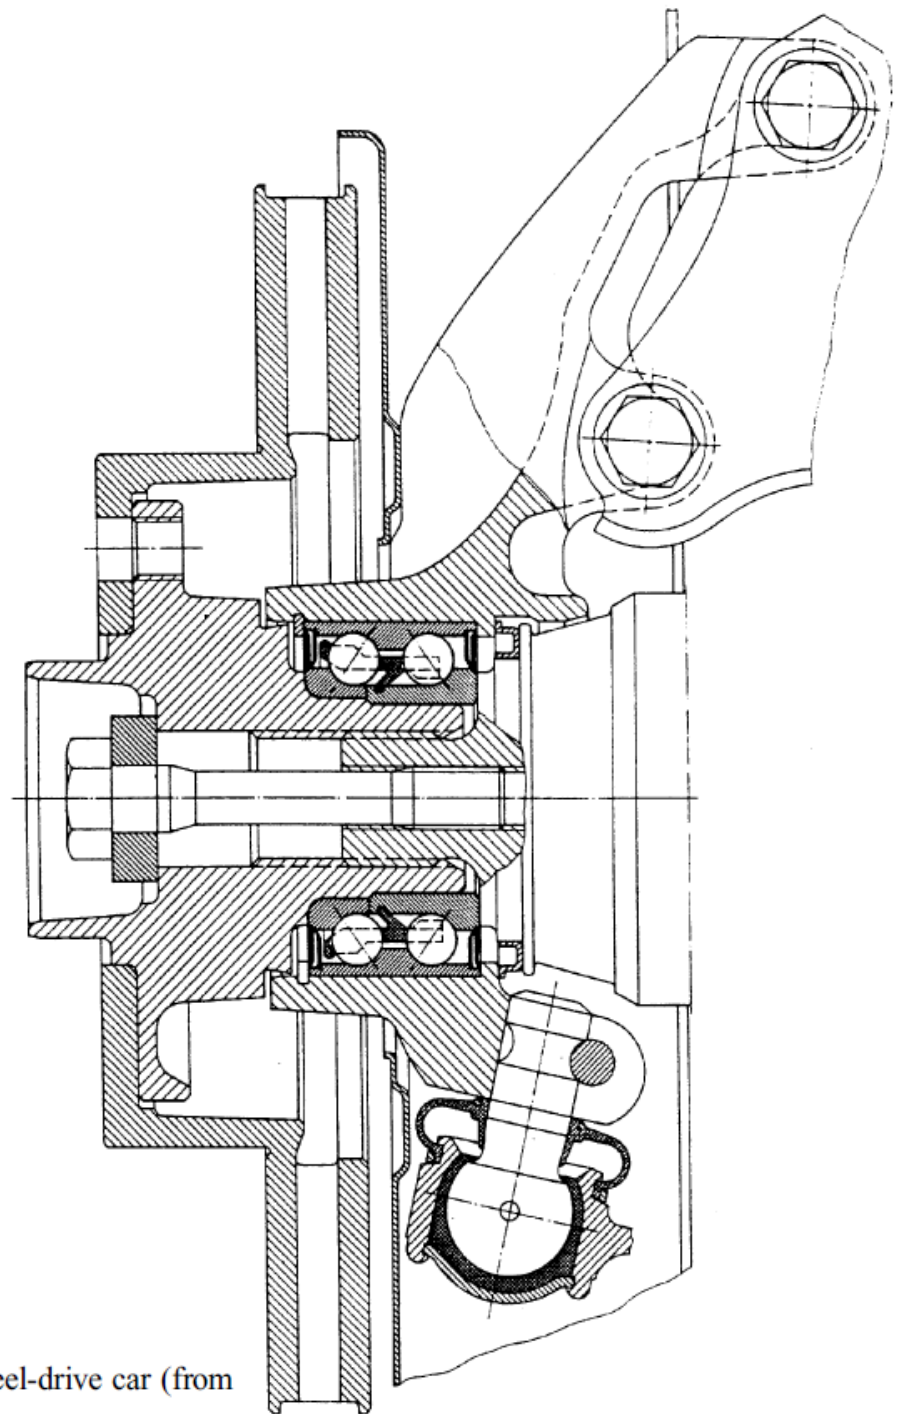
Sealed-for-life bearing in the front wheel of a front-wheel-drive car (from FAG, 1988, with permission).
